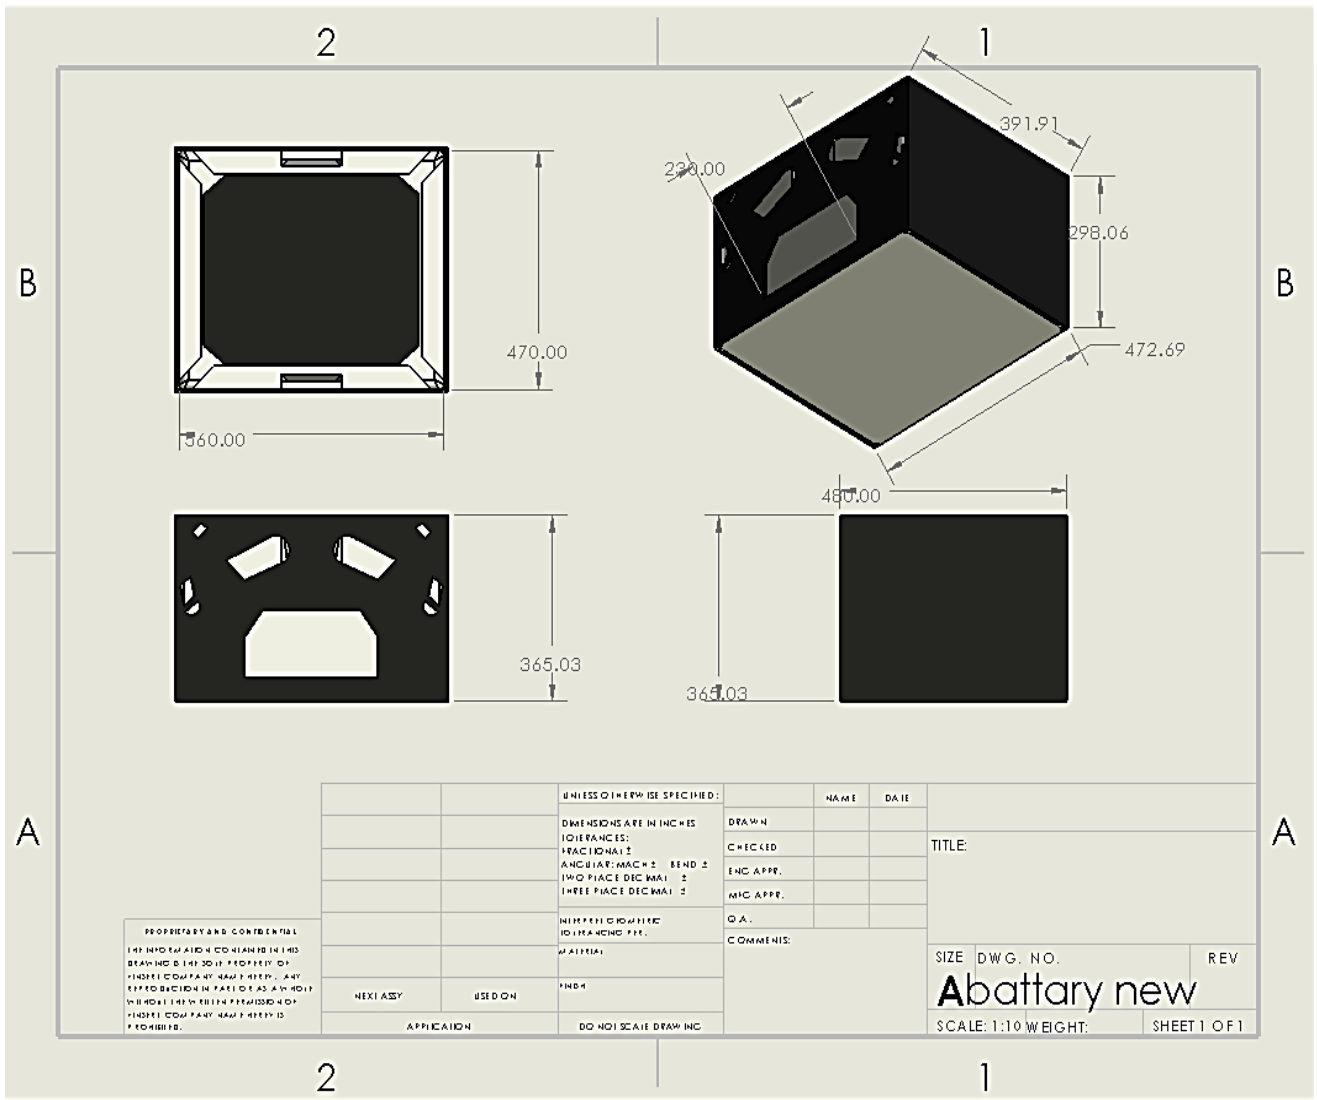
Drawing of the battery pack (mm) (SolidWorks CAD)
